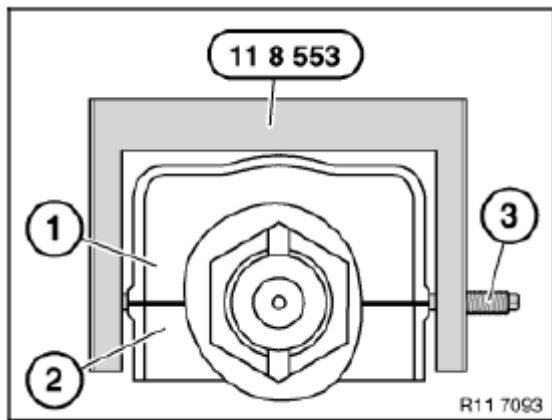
Schematic Depiction Of Special Tool 11 8 553 At Lower Bearing Bank And Upper Bearing Bank
